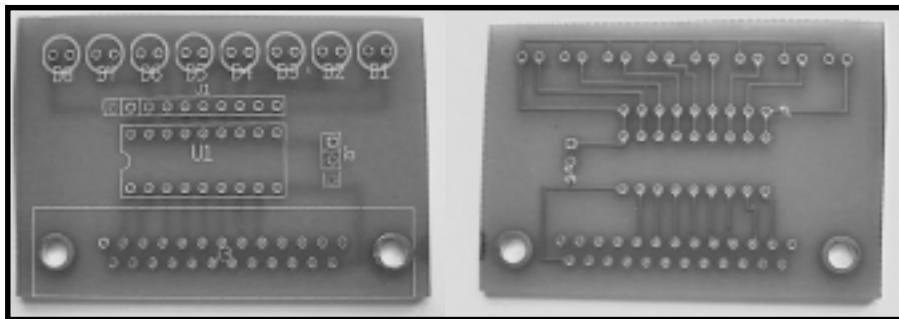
This board was custom made for this circuit, but you can use perf board material as well. We also recommend socketing the ULN2803 instead of soldering the chip to the board in case the chip fails.
